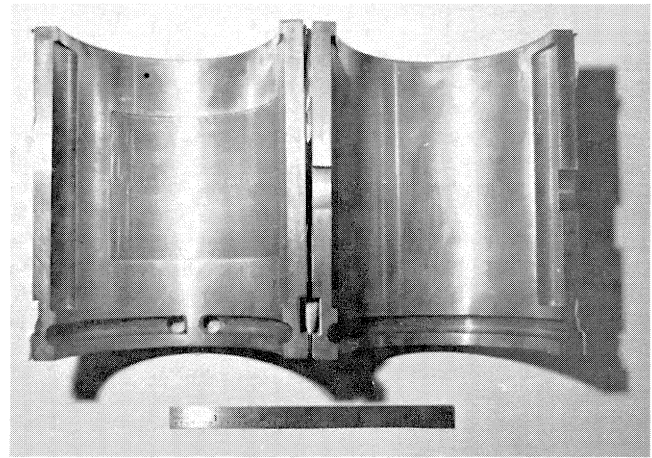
Modified Pinion Bearing Pressure Dam was Cut and Shims were Used at Horizontal Joint.
